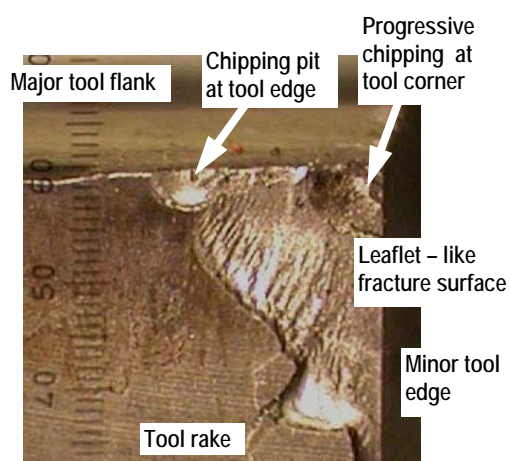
Fracture surface at tool flank arising from chipping pits at tool edge, feed per rev $f = 0,302 \text{ mm}$
